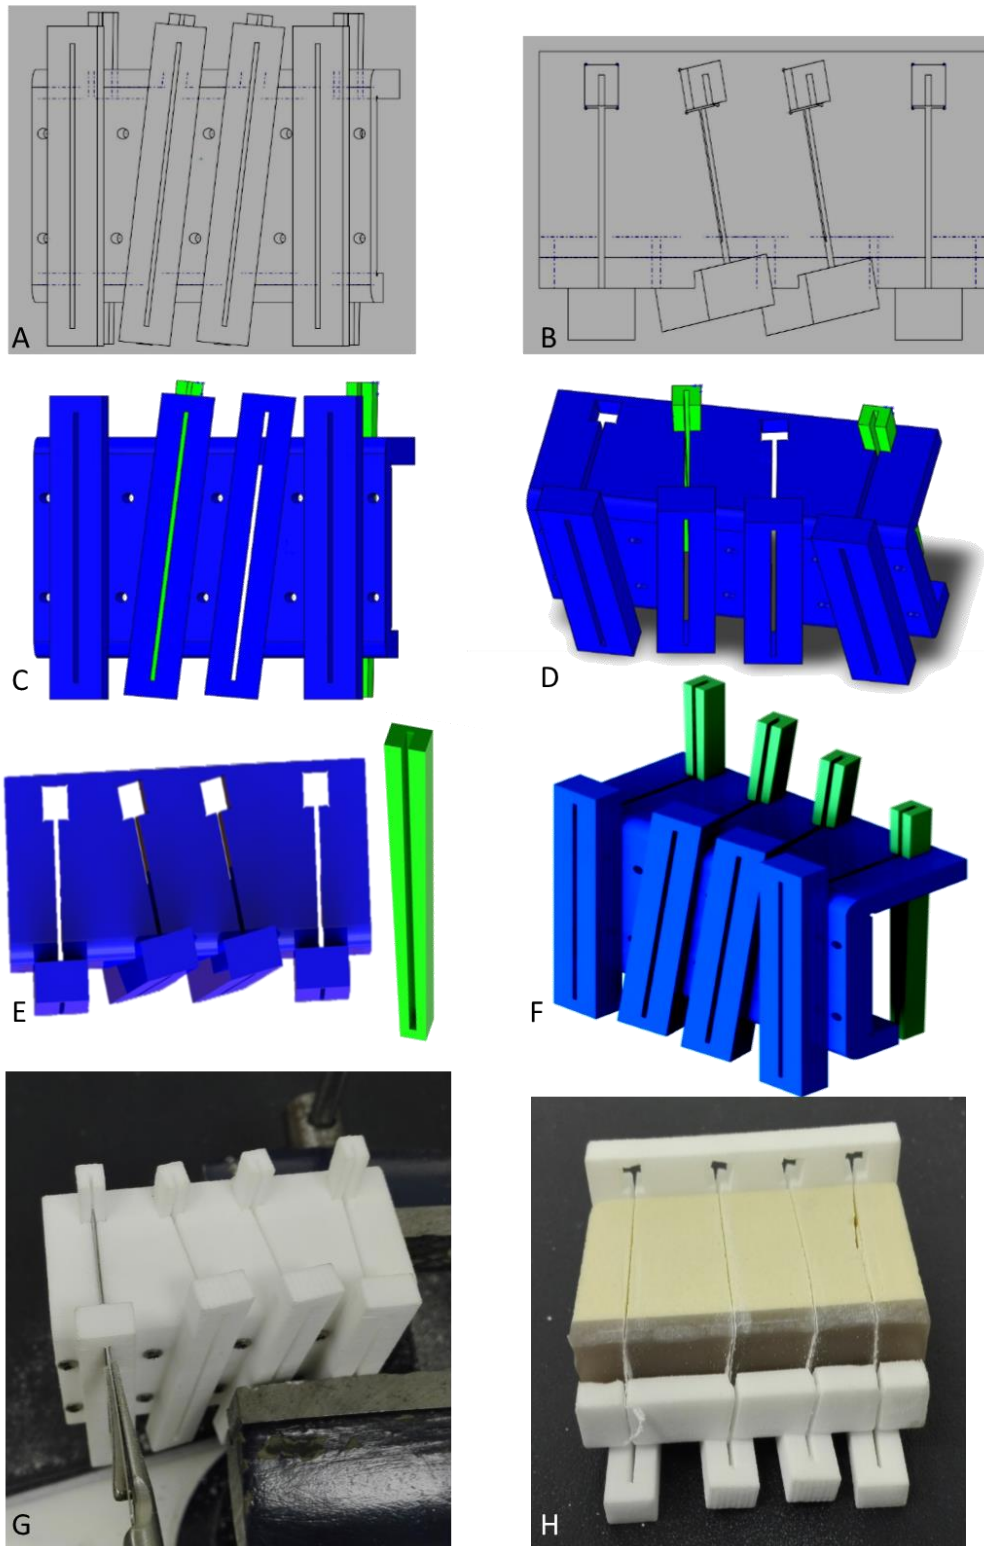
An overview of the recommended resection template as result from this study, design “backguidance 1”. A) Front view of schematic drawing. B) Top view of schematic drawing. C) Front view of partly assembled design in SolidWorks. D) Top view of partly assembled design in SolidWorks, the resection sleeve in the middle shows the planned trajectory and the correspondence between the front, top and the back sleeve. E) The rendered CAD design of both the template (left) as well as the back sleeve that should be put into the hole at the back (right). F) The assembled CAD design. G) The resection template in use during the experiment, it shows that the saw blade follows the trajectory, despite of an angulated insertion of the saw blade through the front sleeve. H) The resulting four osteotomy trajectories, resulting in five small synthesized bone blocks.
